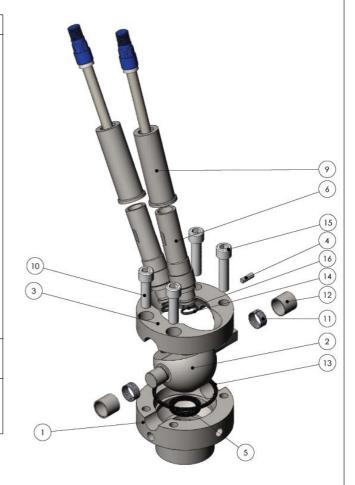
Exploder view and part list, Pasve pH-U mounting valve
